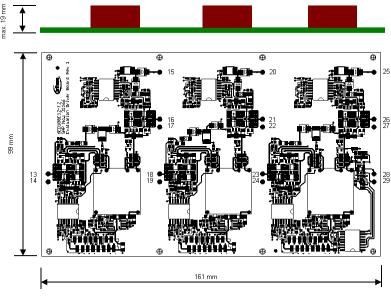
Dimensions of the 6ED100E12-F2 Driver Board
